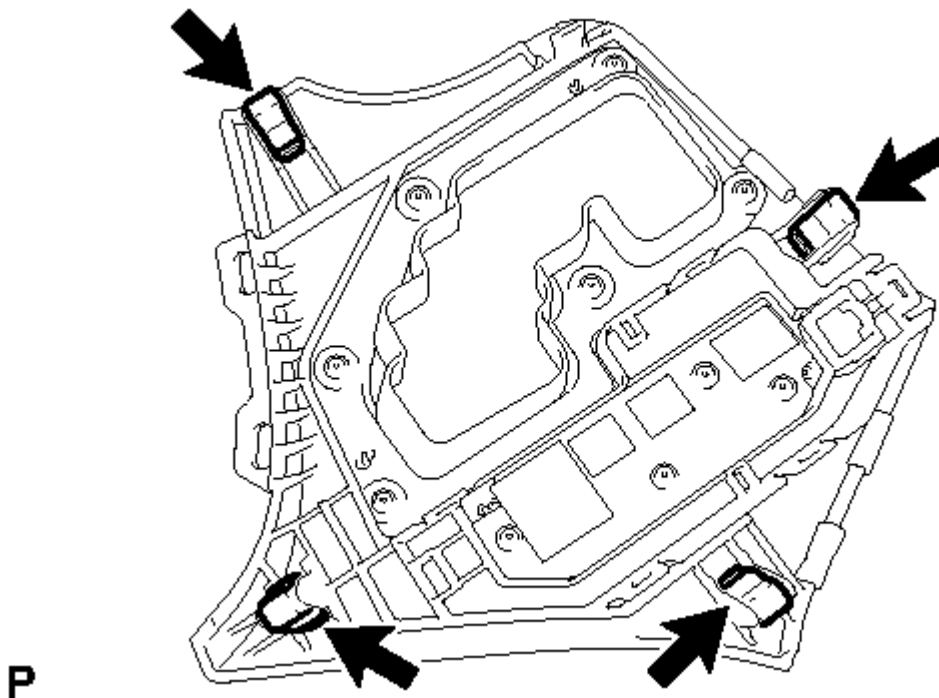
Identifying Shift Position Indicator Housing & Clips
